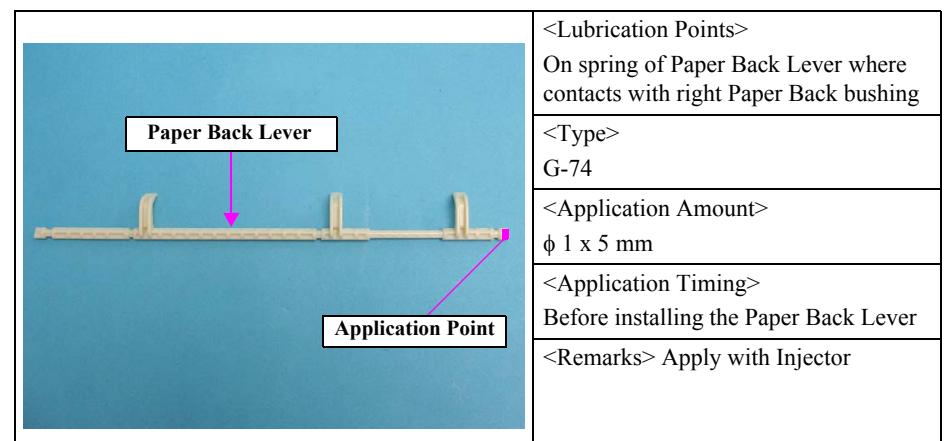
Lubrication of the Rear Paper Guide (5)
